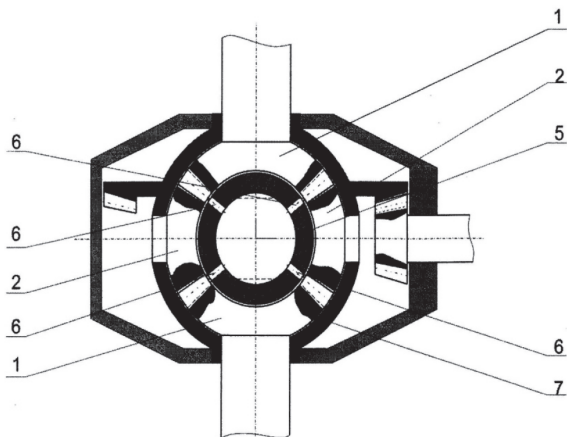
Schematic sectional view of the proposed self-locking axle differential, 1 – planetary bevel gear, 2 – satellite bevel gear, 5 – spherical hollow body, 6 – flow channel, 7 – ring gear
